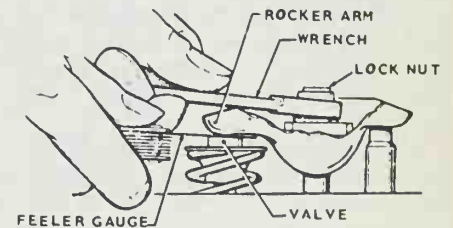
Procedure for setting valve clearance of valve-in-head engines. See text for correct valve lash.
